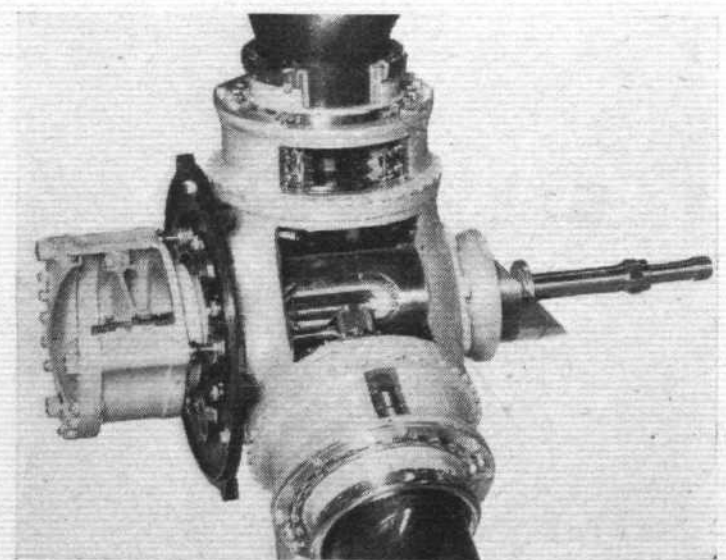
Parts of the pitch-changing mechanism are visible in this sectioned hub.
